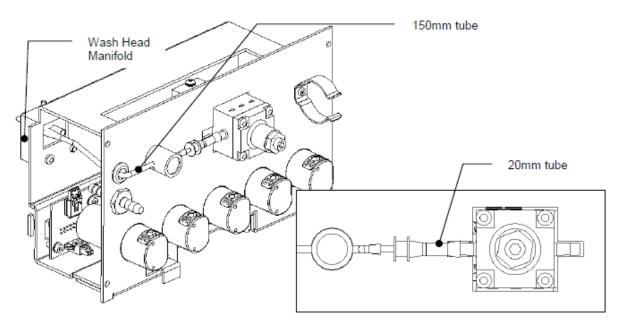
Connecting the KNF Pump to the Wash Head Manifold
